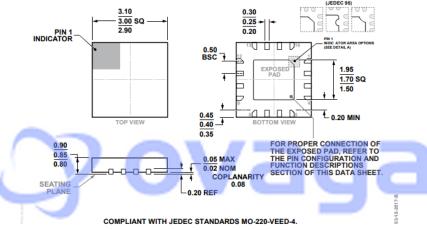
16-Lead Lead Frame Chip Scale Package [LFCSP] 3 mm × 3 mm Body and 0.85 mm Package Height (HCP-16-1) Dimensions shown in millimeters
